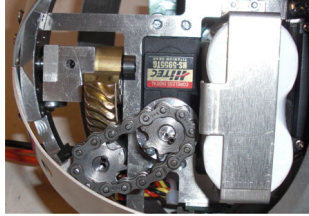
Roller chain connecting the servo motor to the worm gear.
